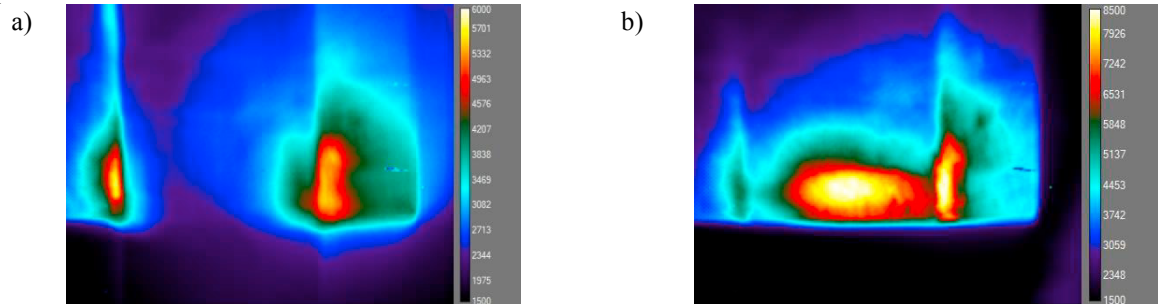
a) Thermography of tool's rake face when cutting the workpiece; b) Thermography of the tool/chip contact zone (2nd situation).
